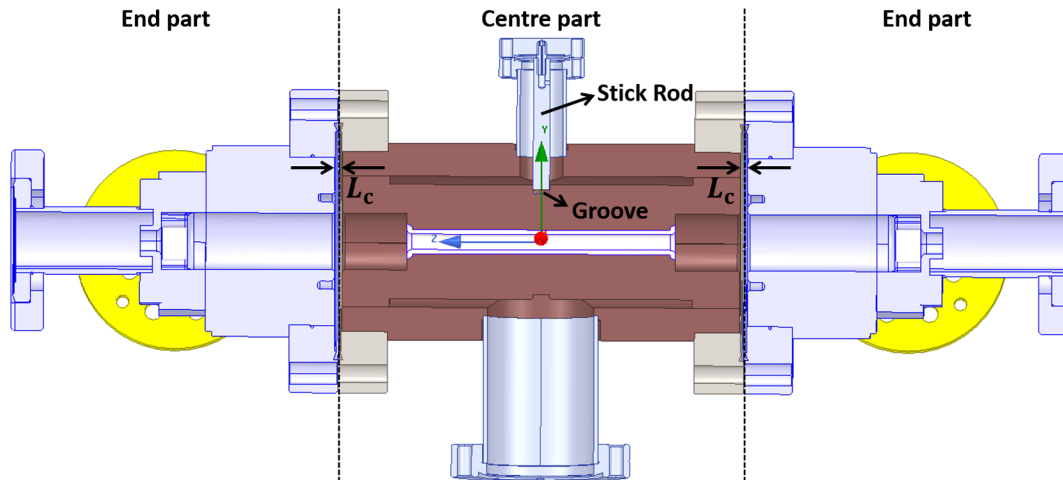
Full-assembly mechanical design for the whole structure, including a center part and two end parts.
